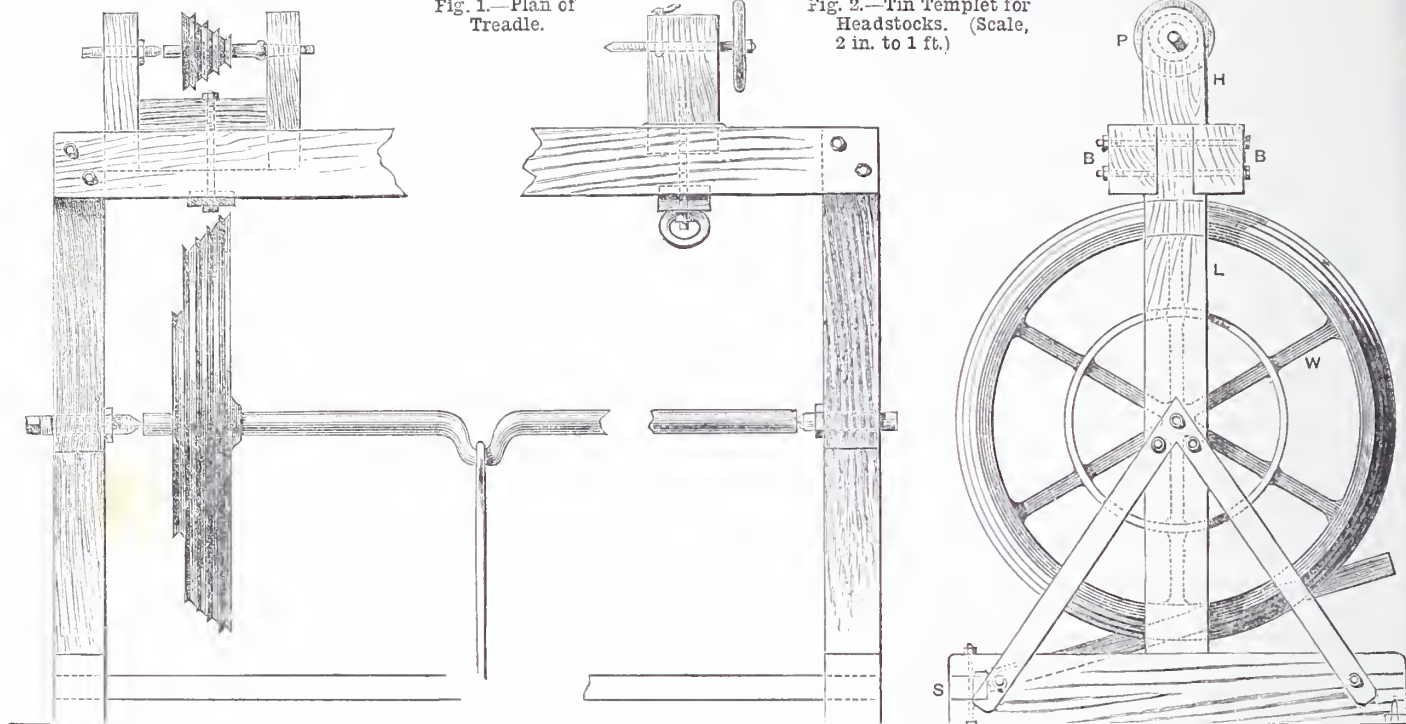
Front View of Lathe. Fig. 4.—End View of Lathe—P, Pulley; H, Headstock; B, Bed; L, Leg; W, Flywheel; S, Stretcher. (Scale, 1 in. to 1 ft.)
